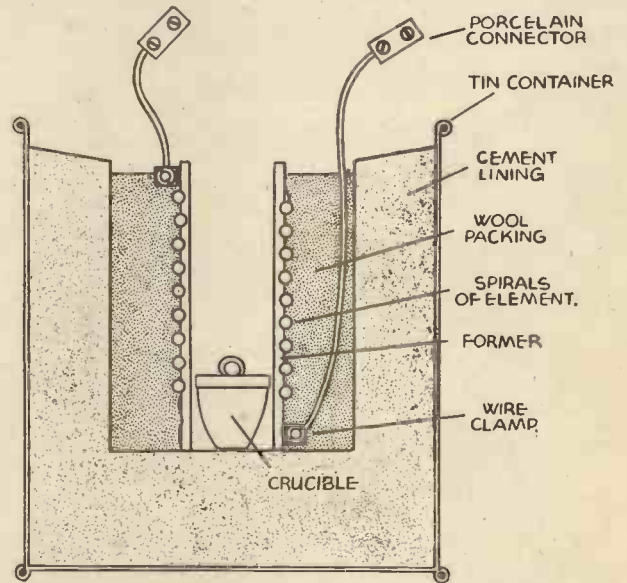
A sectional view of the furnace showing the method of assembly.
